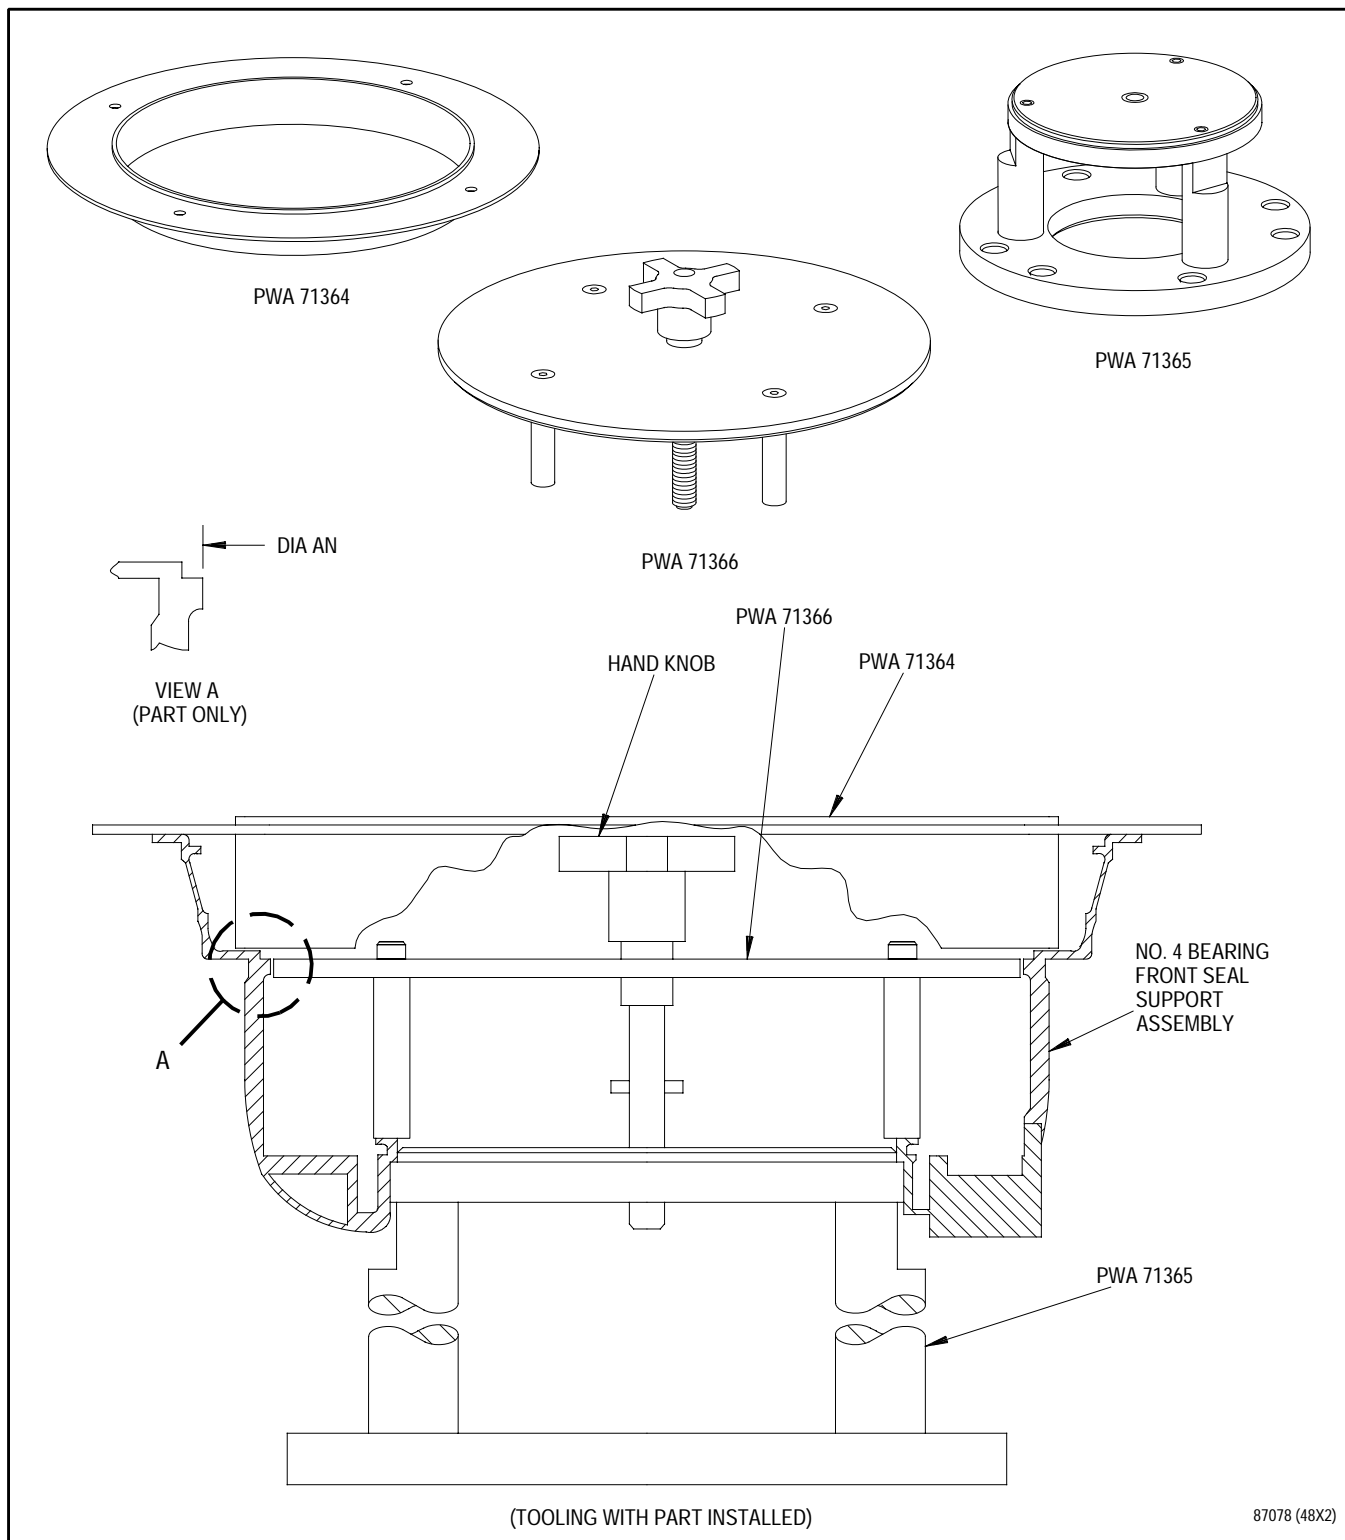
No. 4 Bearing Front Seal Support Assembly - Chevron Seal Mating Surface Plasma Spray
